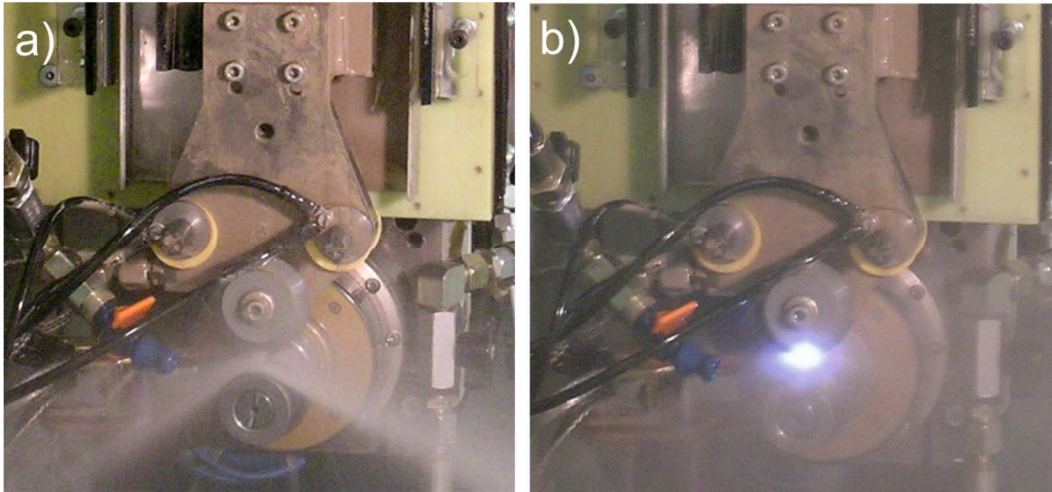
New wire guide: a) Detail of grinding oil supply trough the wire guide system; b) WEDD using a new wire guide
